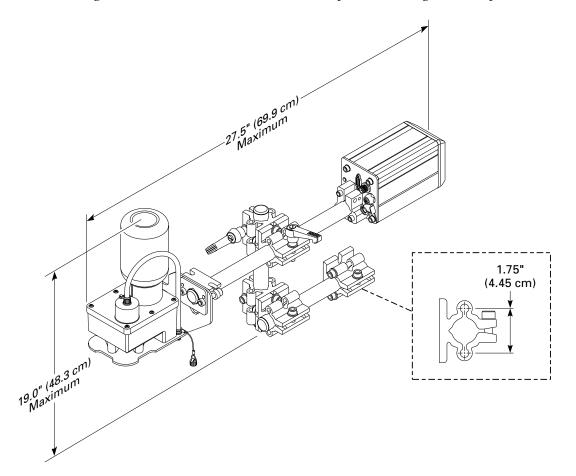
O: Standard HR Series Conveyor-Mounting Bracketry Dimensions
